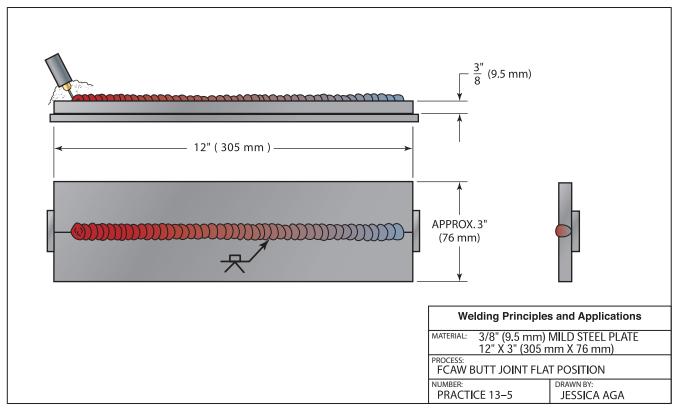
FCAW butt joint, 3/8-in. (9.5-mm) mild steel flat position.
